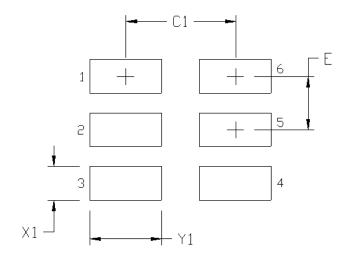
Si565 (3.2×5 mm) PCB Land Pattern
